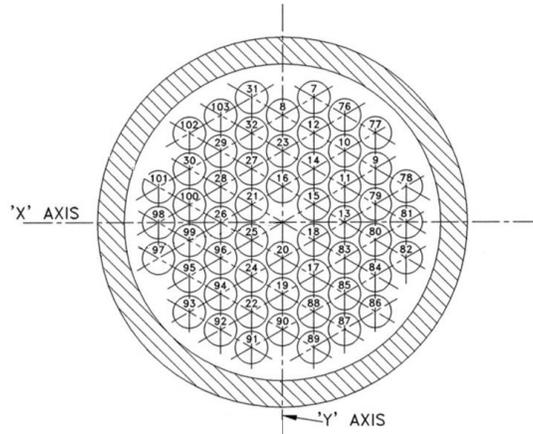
Reheater inlet tube sheet (hexagonal pattern)
